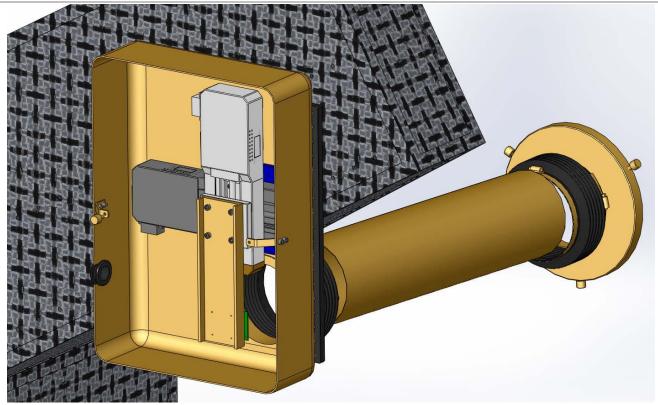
Close-up of Receiver with cover removed (right-hand version shown, left-hand version is similar).
